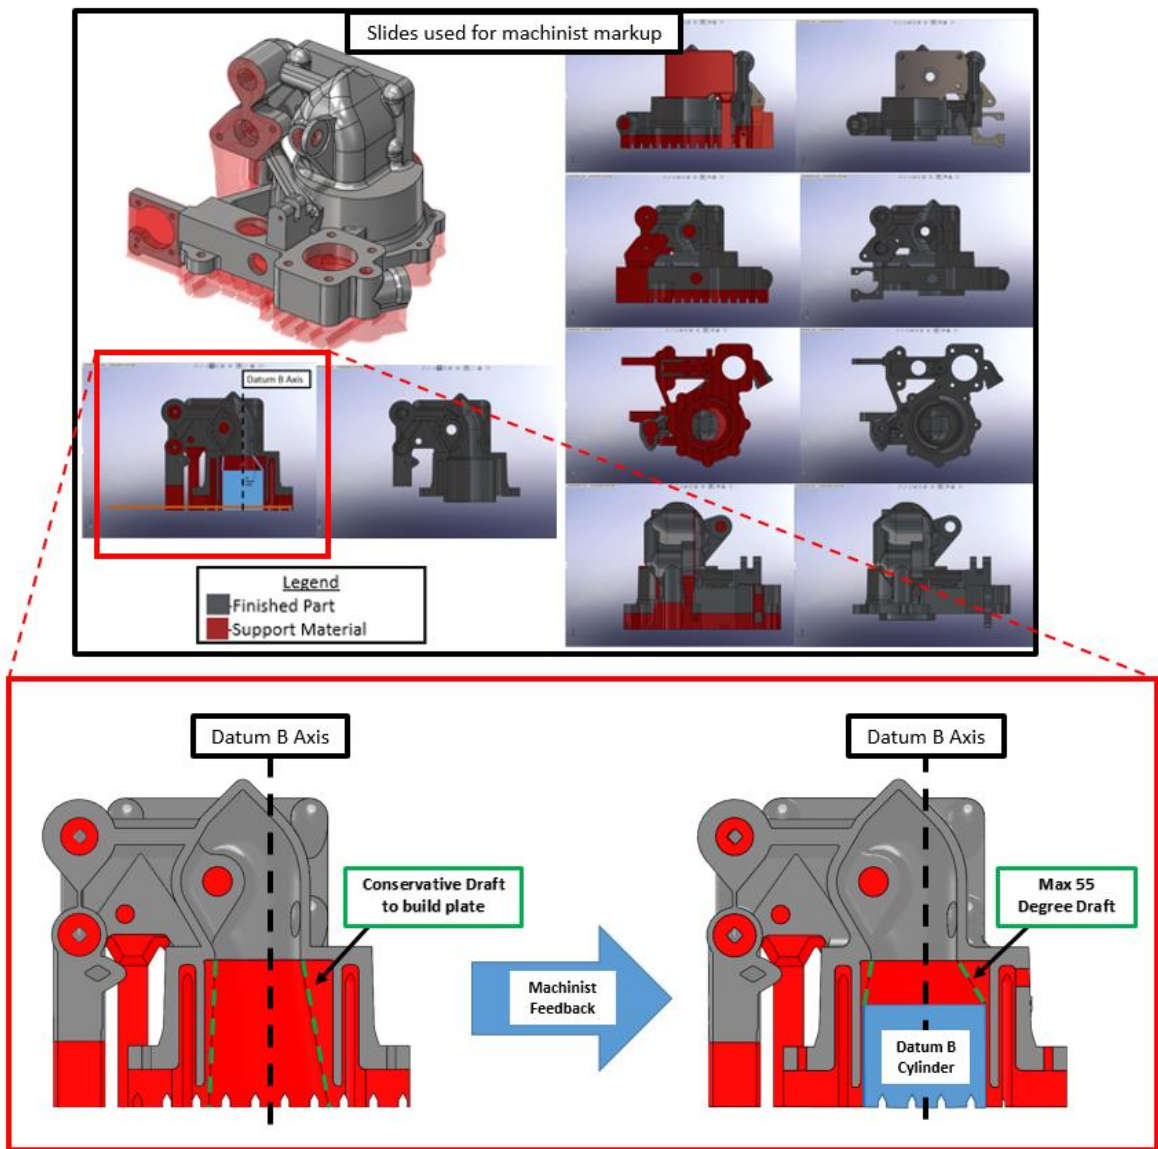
Slides provided showing the TBR and Final Part side by side provided to the machinist for markup, the geometry change made per machinist feedback shown below.
